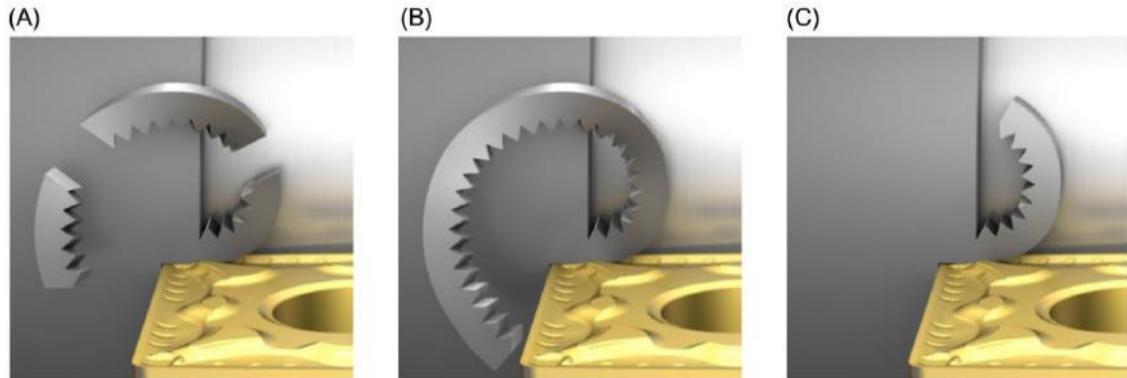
Chip breaking principles A) self-breaking, B) contacting with cutting inert, C) contact with workpiece [33].
